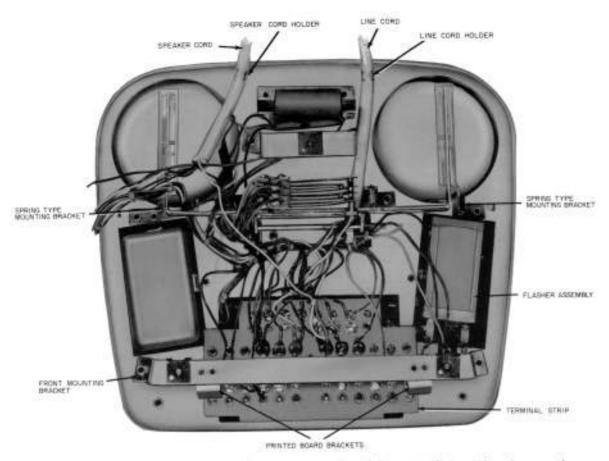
Main unit assembly with lower housing and amplifier printed circuit board removed.
